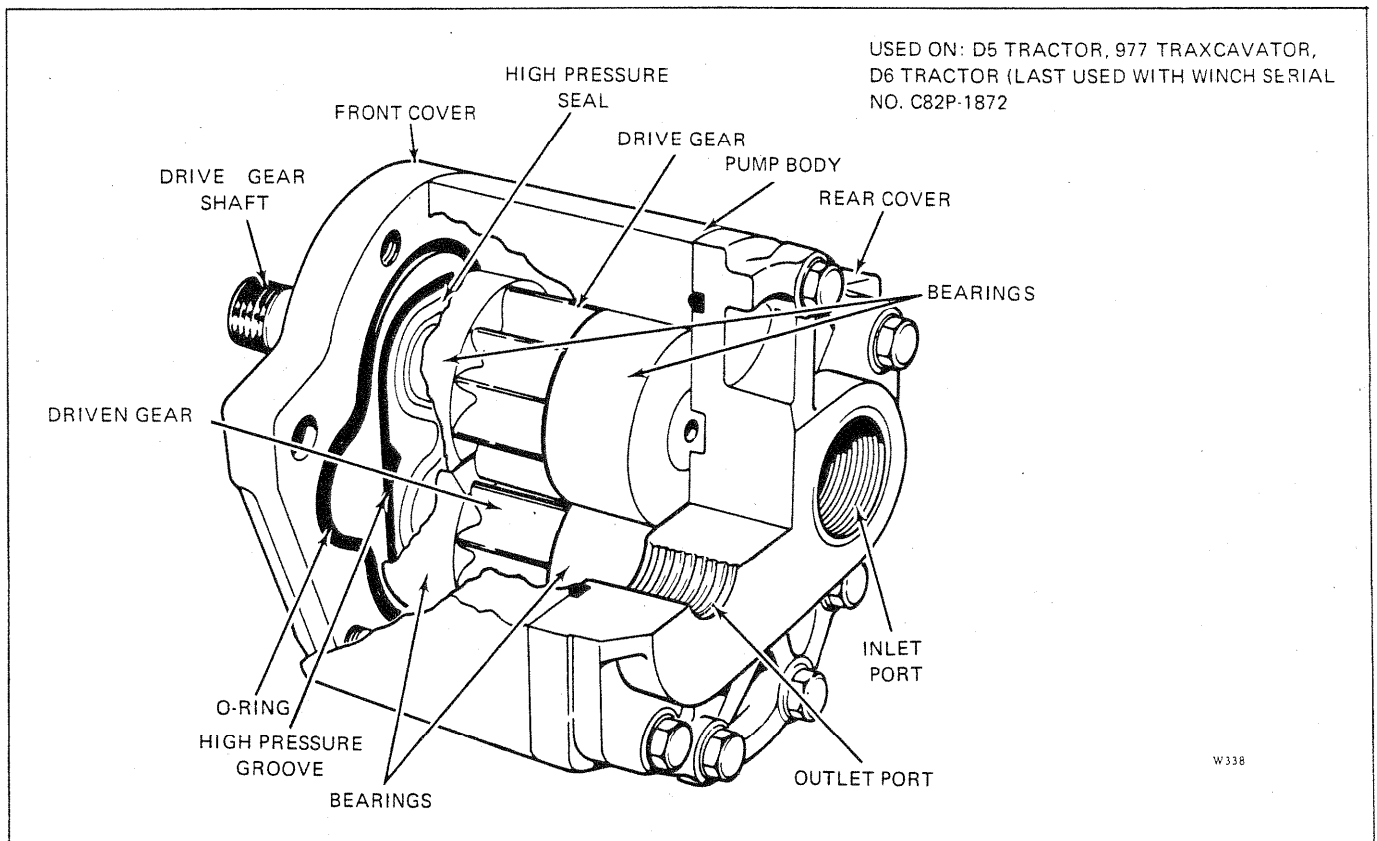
HYDRAULIC PUMP ASSEMBLY (Sheet 1 of 2)
